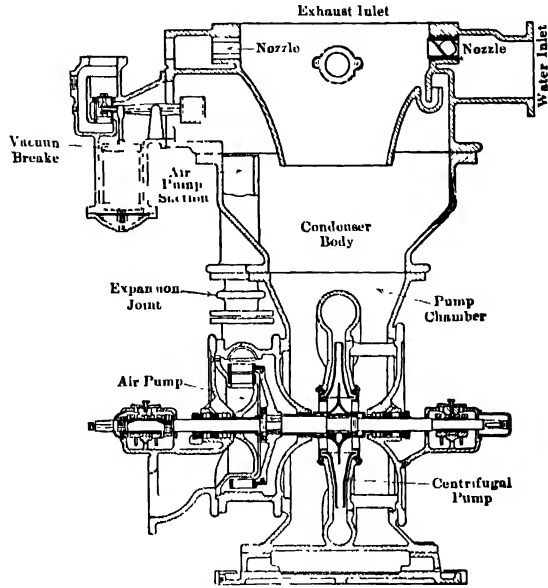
Westinghouse-Leblanc Multi-jet High-vacuum Condenser.
